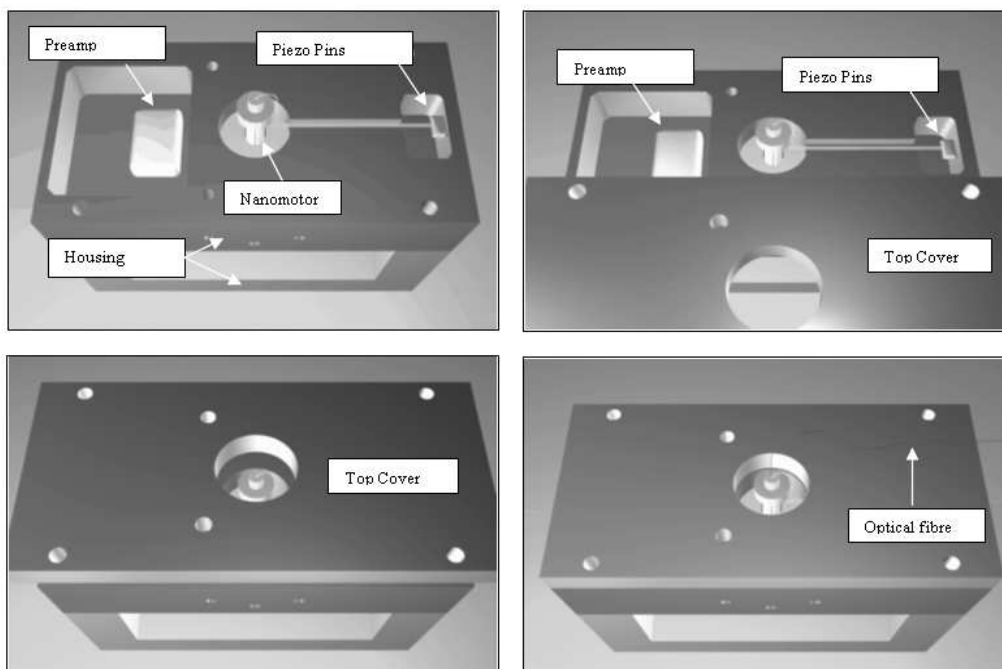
3D CAD drawings of SNOL scanning unit
